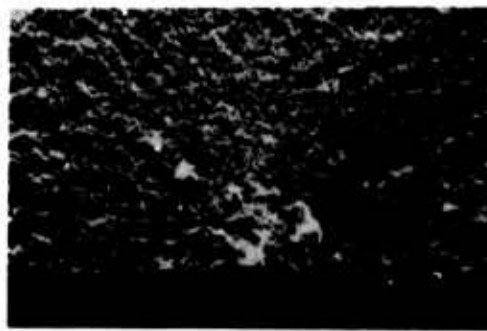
Fracture surfaces of specimen 3-5, showing fracture origin at seeded 125 μm (0.005 inch) simulated void (aluminum oxide inclusion).
